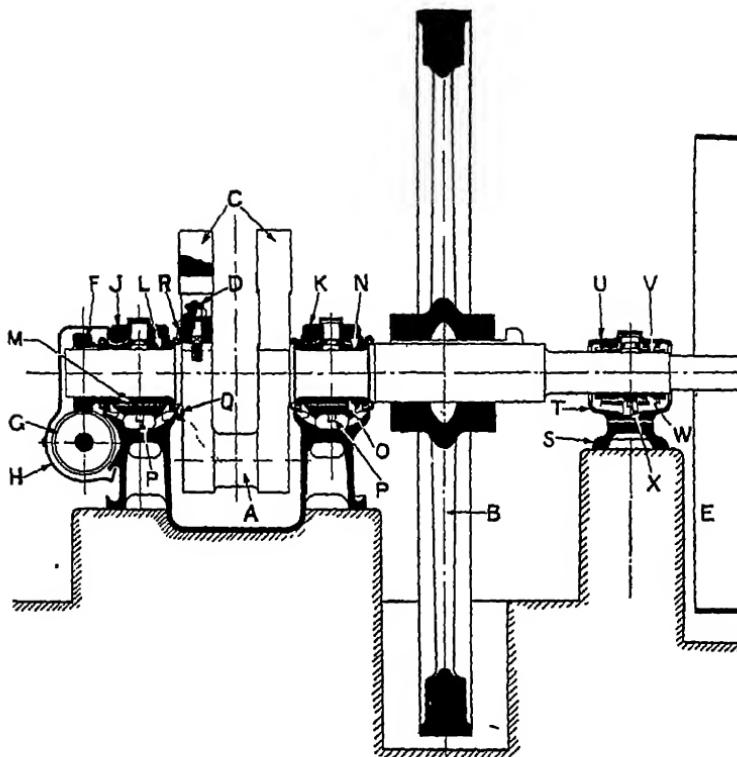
CROSSLEY CRANKSHAFT, MAIN BEARINGS
